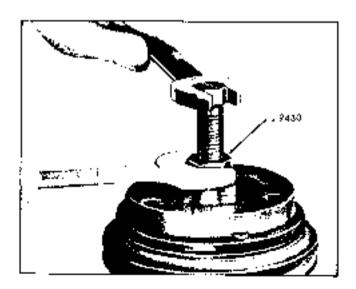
A-8 Installing Hob and Drive Plate Assembly
